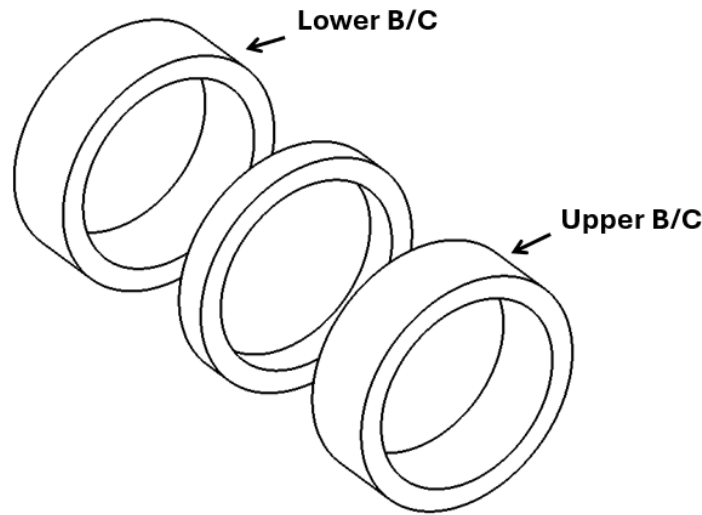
Illustration of lower B/C and upper B/C for cutting tests
